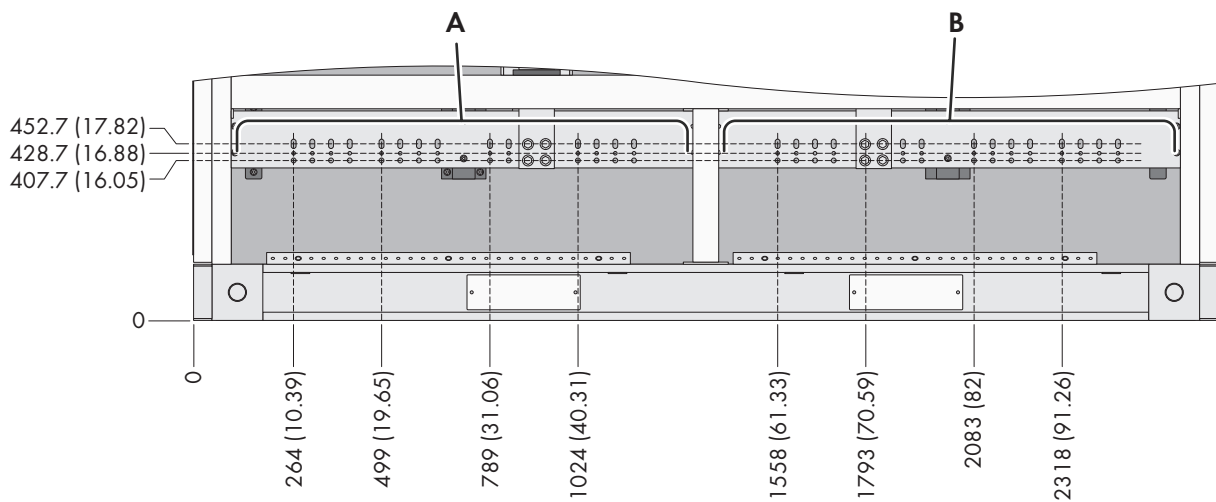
Position and dimensions of the DC busbar (Dimensions in mm (in))
